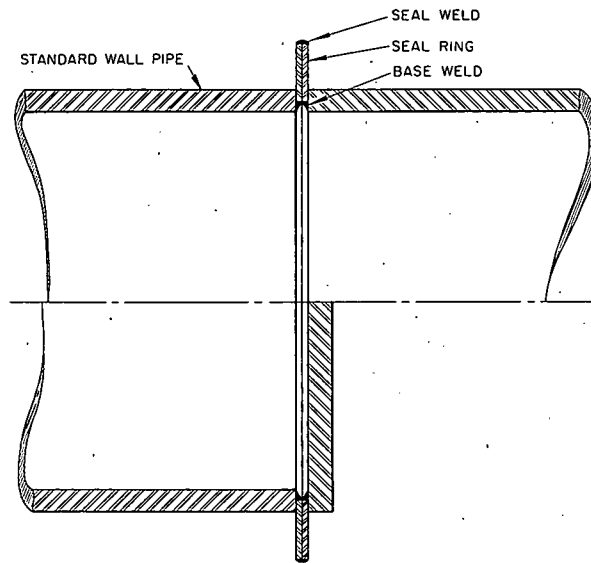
Seal-Ring Pipe Coupling and Tank Closure.
